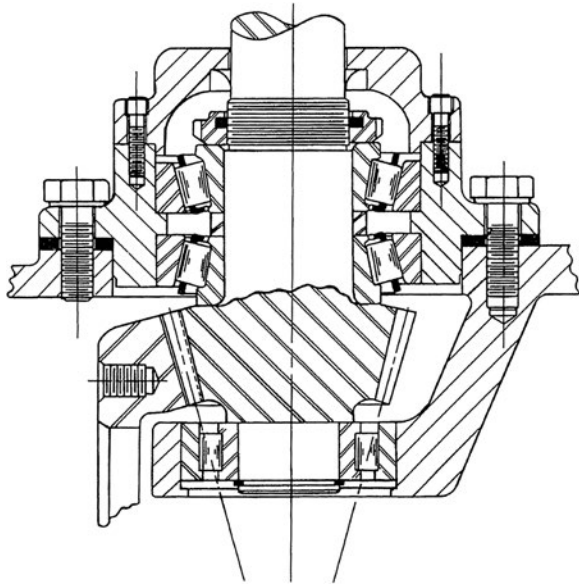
Webless-type gear member, straddle mounted using two opposed tapered roller bearings widely spaced to provide good control of gear.
